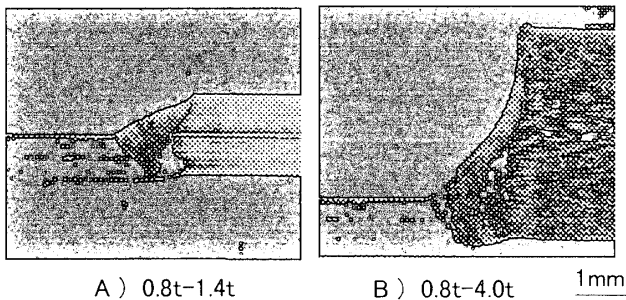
Cross section of differential thickness butt joint with laser welded.
